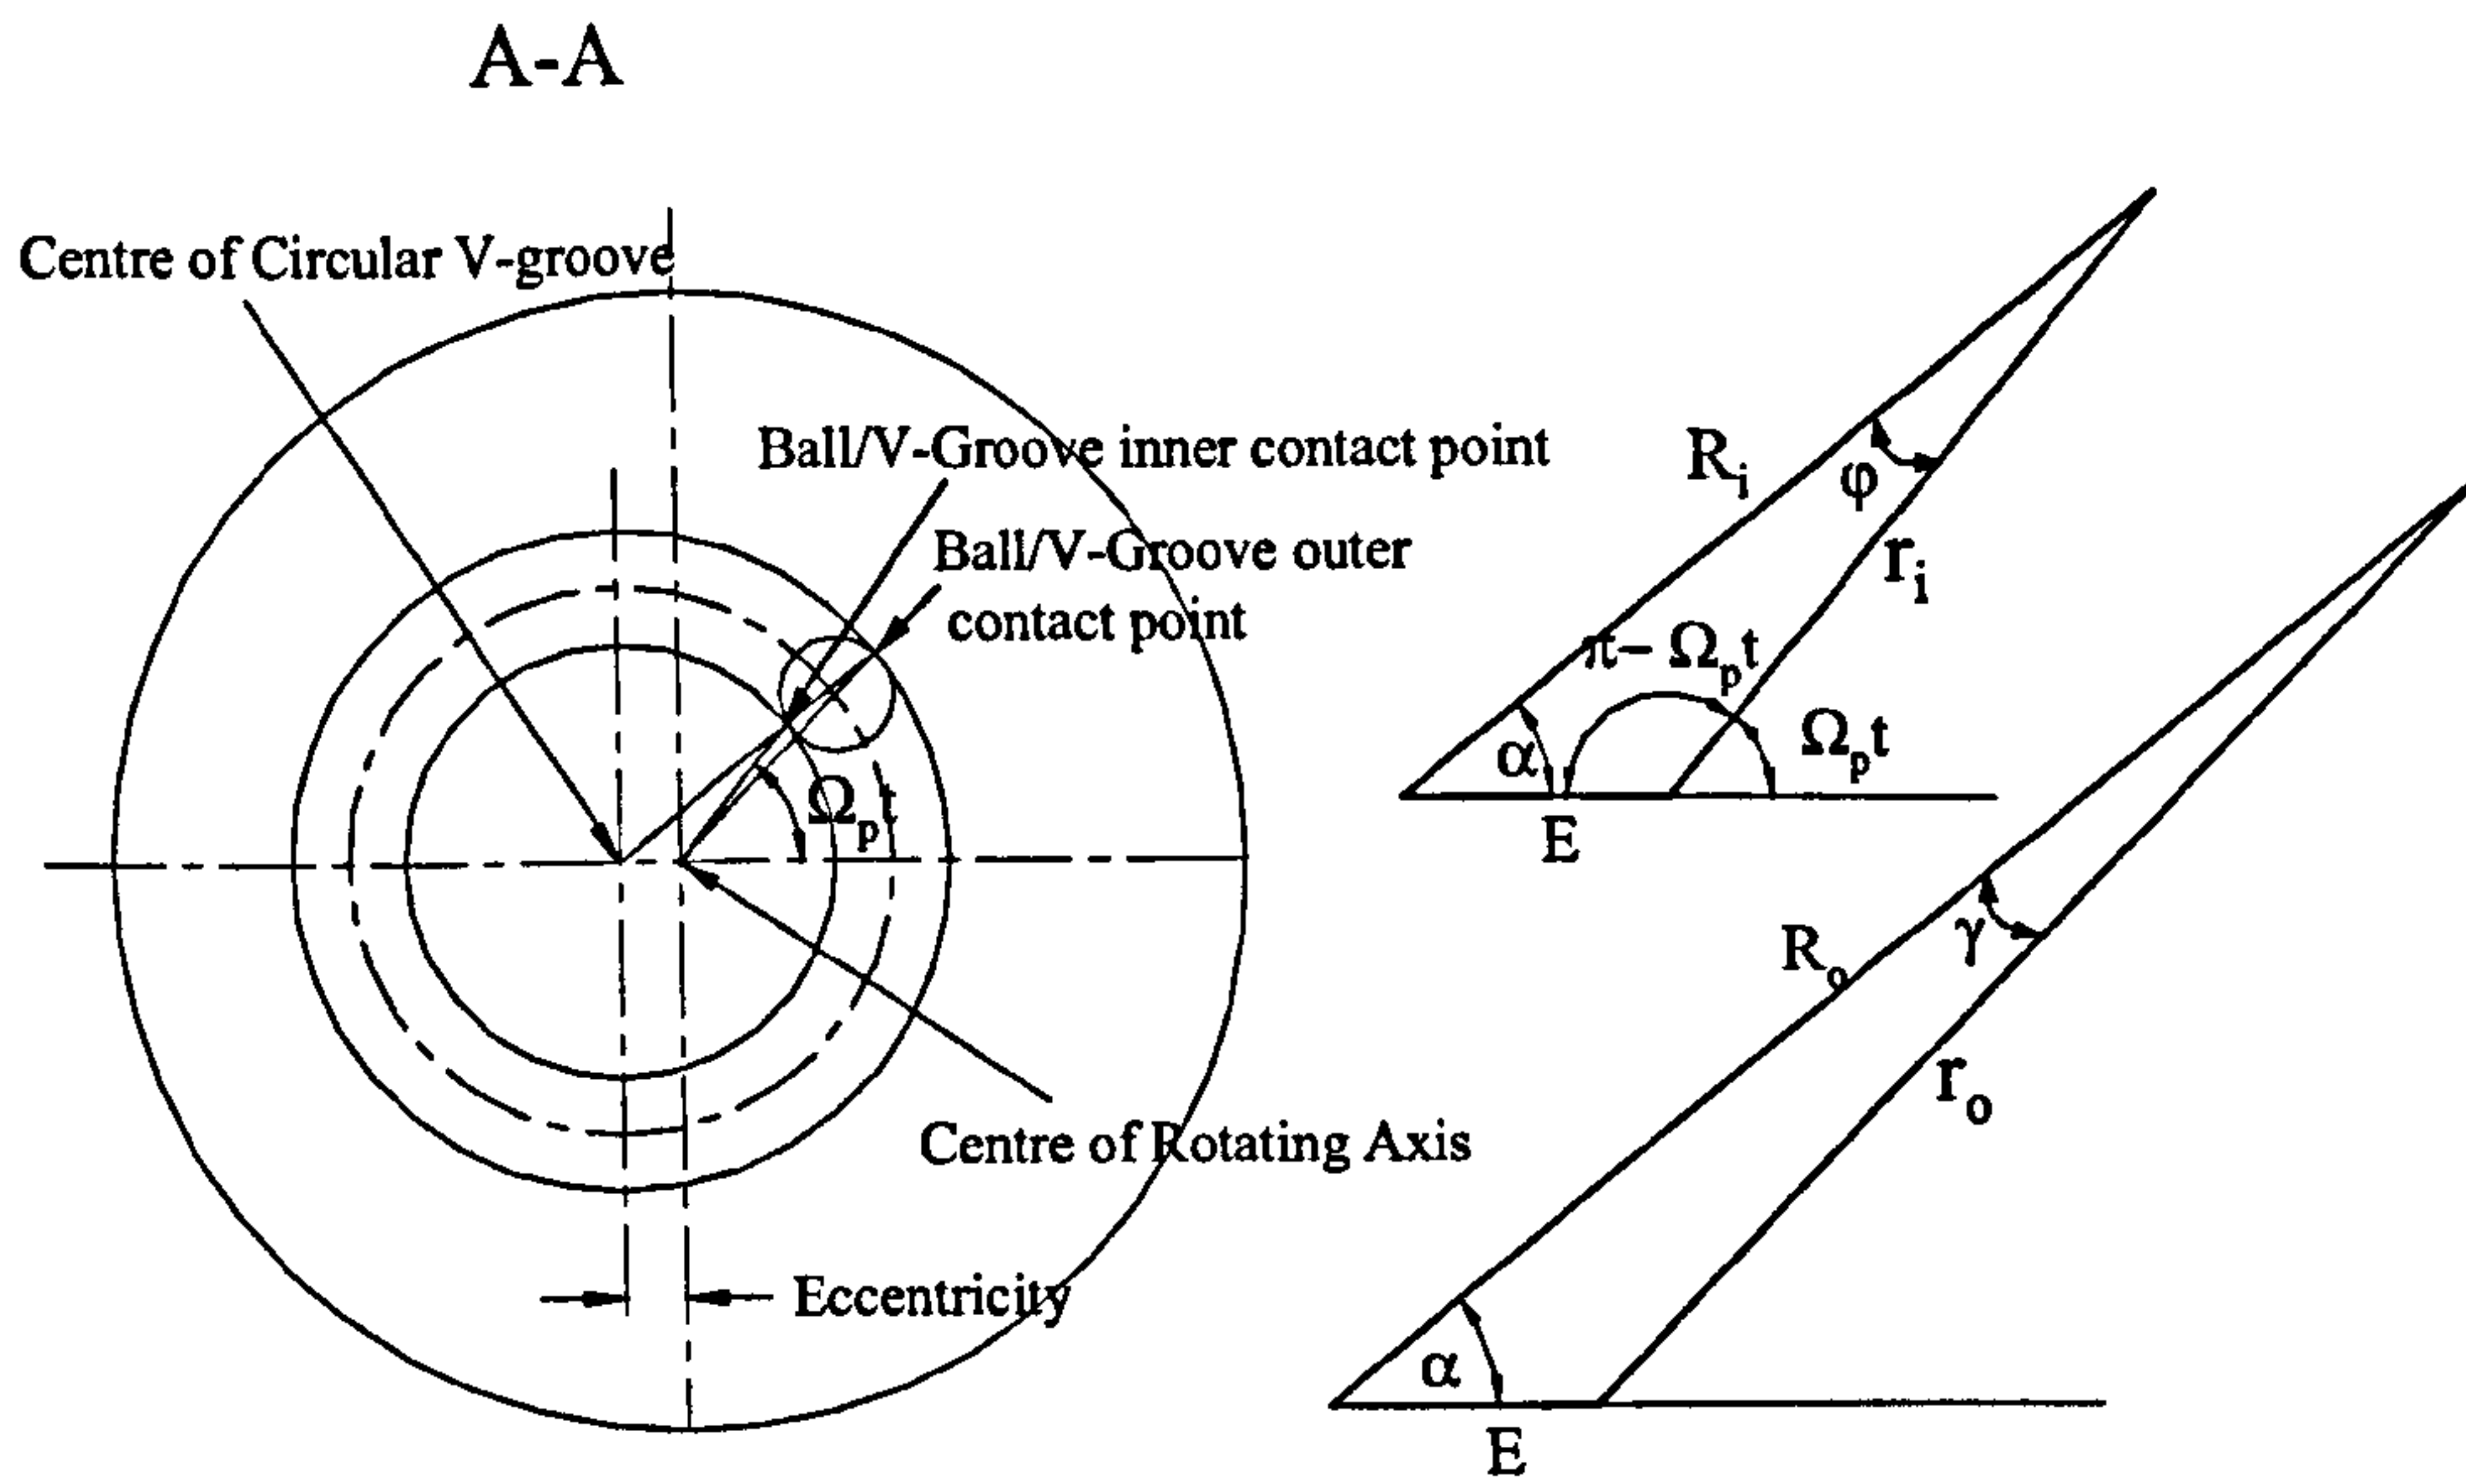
Rotating speeds of lower plate at ball/V-groove inner and outer contact points
